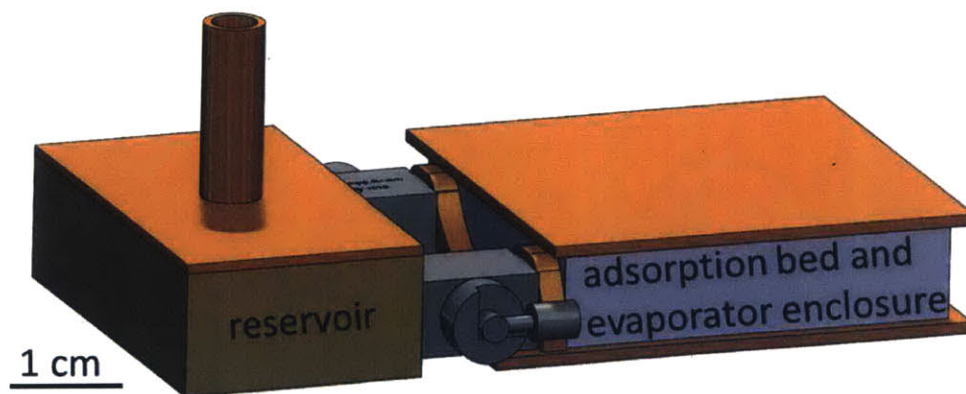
CAD model of the final Button Cell Prototype design. On the left, the reservoir consists of a hollow brass base with a bonded copper top and a tube attached for filling. In the center, two valves serve to interface the reservoir to the steel shell which forms the side walls of the chamber on the right. Inside this steel shell are the evaporator medium, bonded to the bottom surface, and adsorbent bed which is bonded to the top. These components can be seen in Fig. 12.
